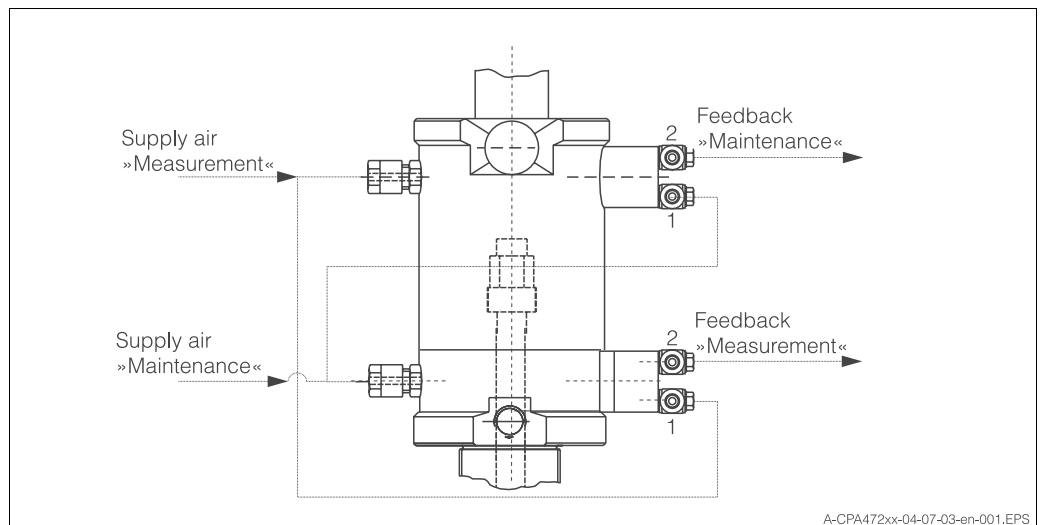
Connection of the pneumatic lines to the CPA 471 assembly
